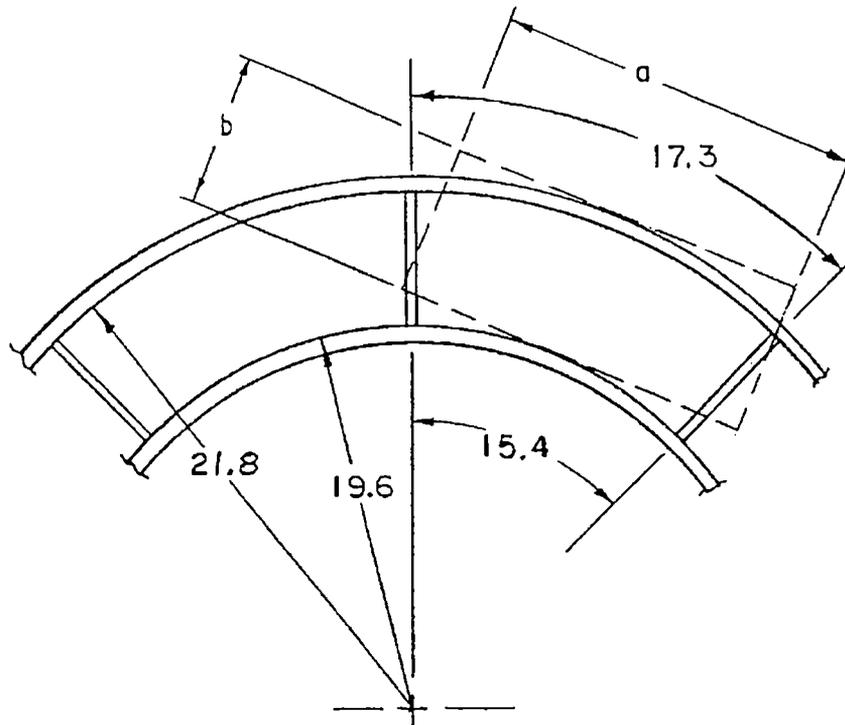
Expansion Tank Stiffener Load Geometry
